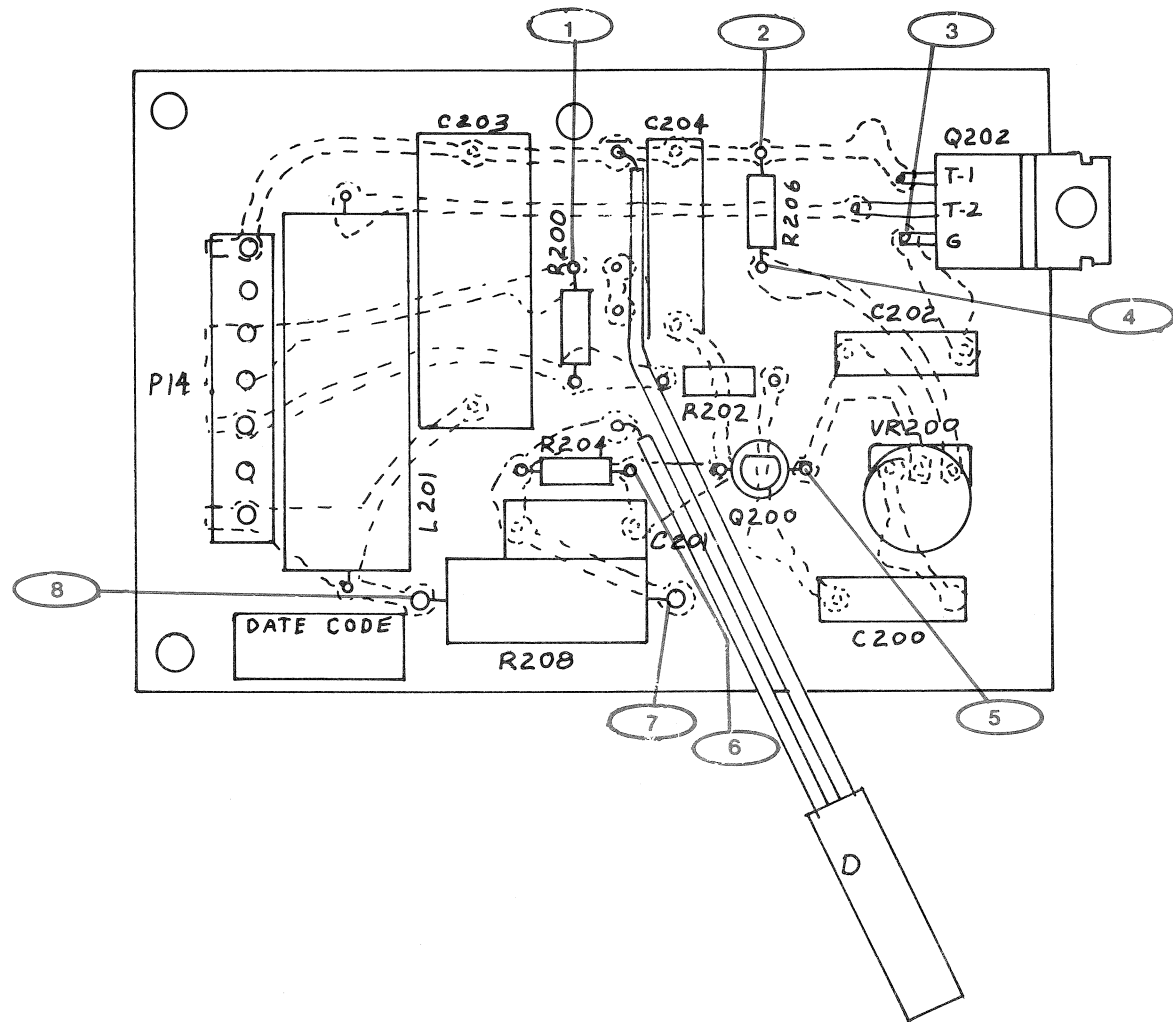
LAMP REGULATOR BOARD ASSEMBLY (Model 3230)
